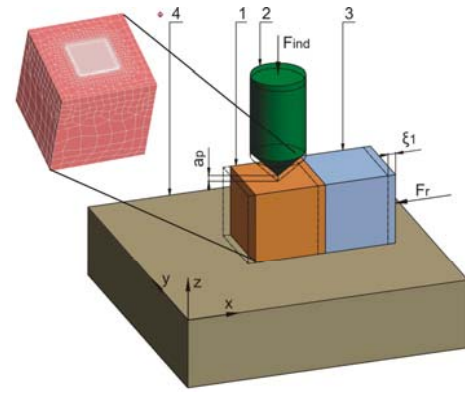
CAD model of workpiece, indenter, thruster, and base support
